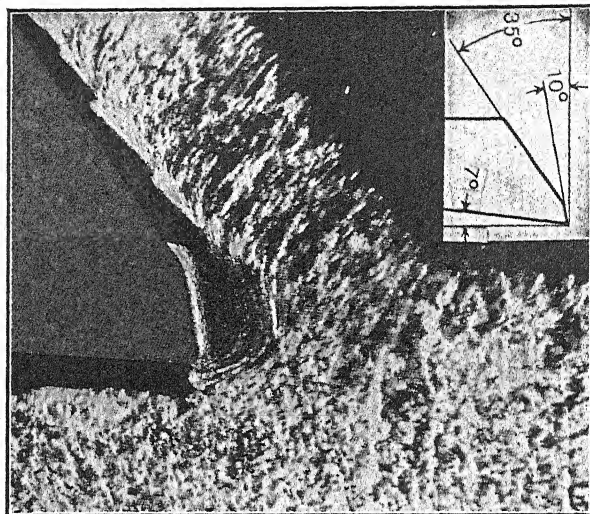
A Built-Up Edge Formed in Annealed Low-Carbon Steel by a Tool with a 15-Deg. Rake Operating at a Depth of Cut of 0.020 In. and a Cutting Speed of 120 F.P.M.
